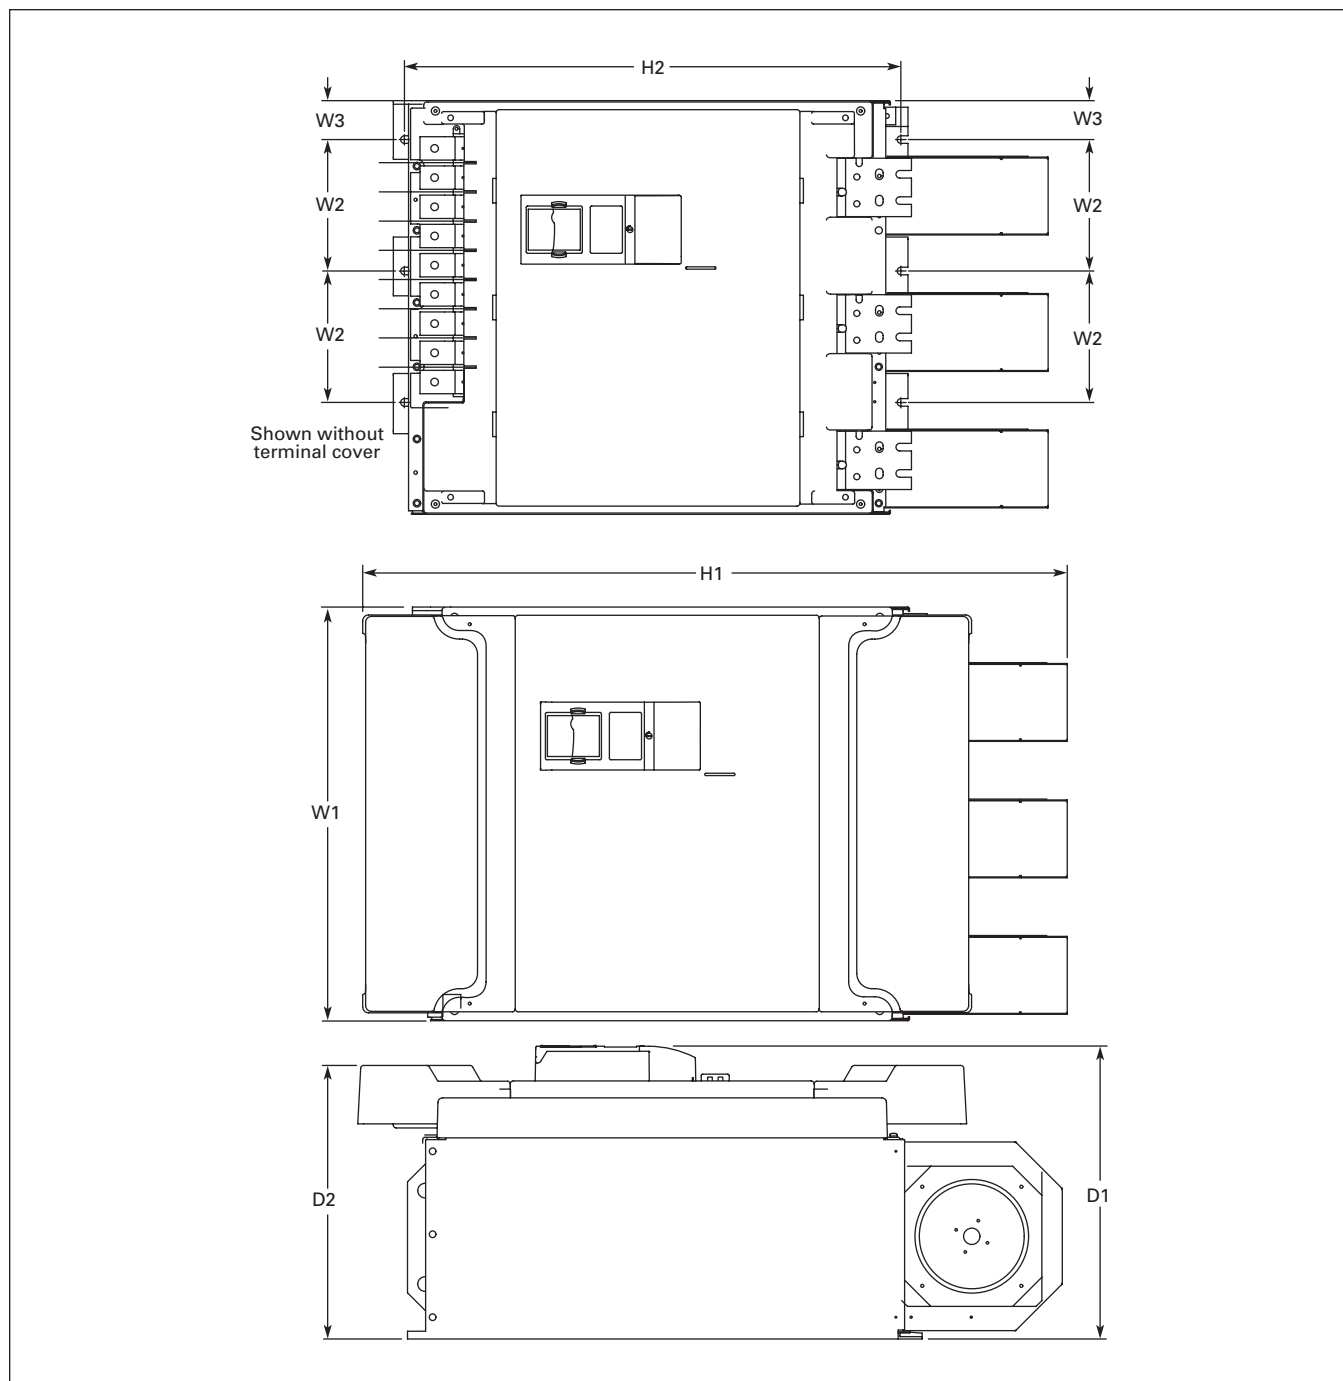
HVX9000 Dimensions, FR11 Open Chassis
